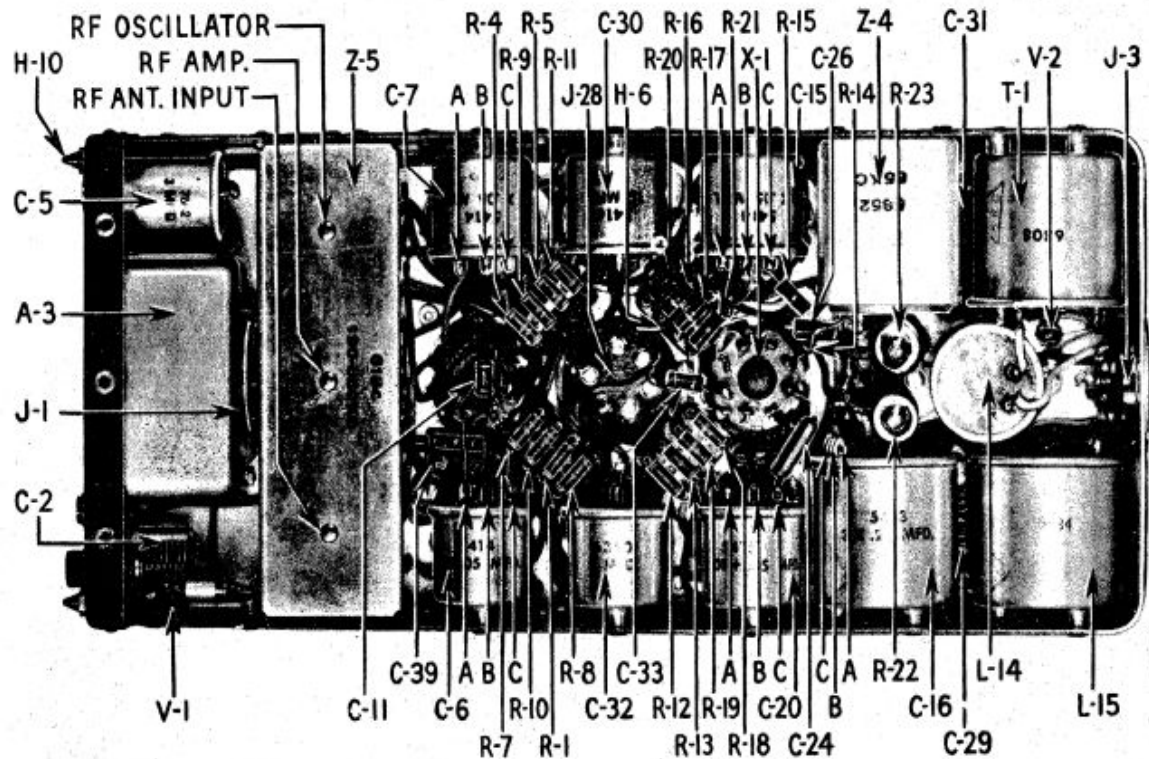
TYPICAL RECEIVER, BOTTOM VIEW, INSIDE
